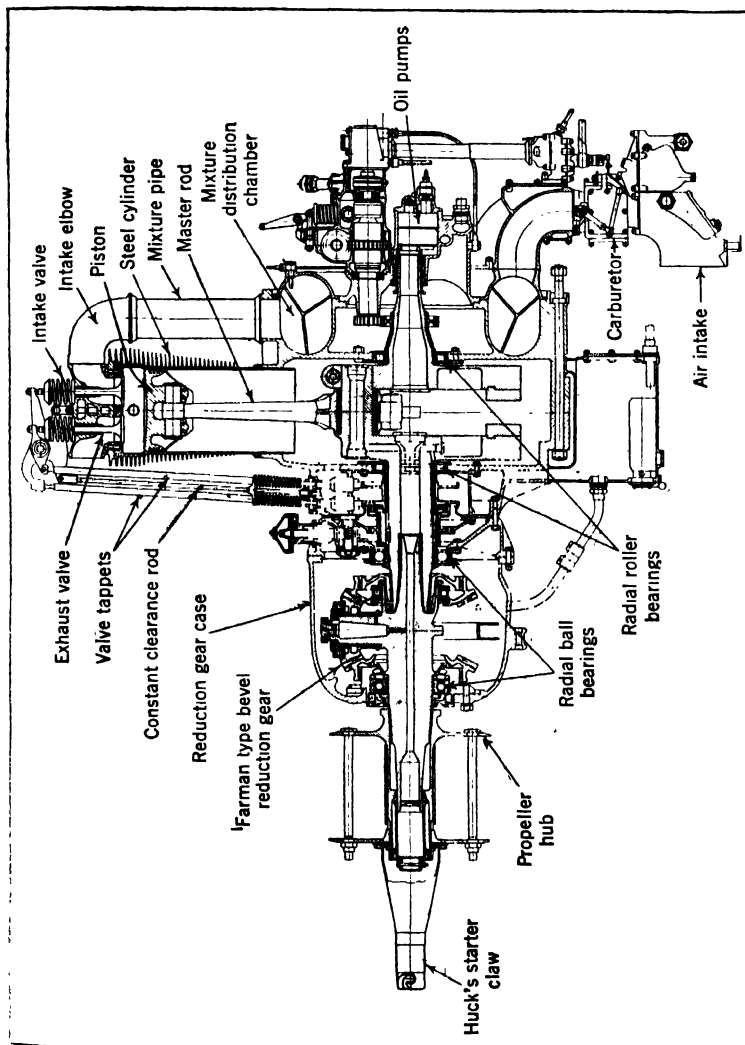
A.—Longitudinal Section View of Bristol-Jupiter VI Nine-Cylinder Aircraft Engine Showing Application of Farman Type Bevel Reduction Gear, Also Internal Construction of Engine.
